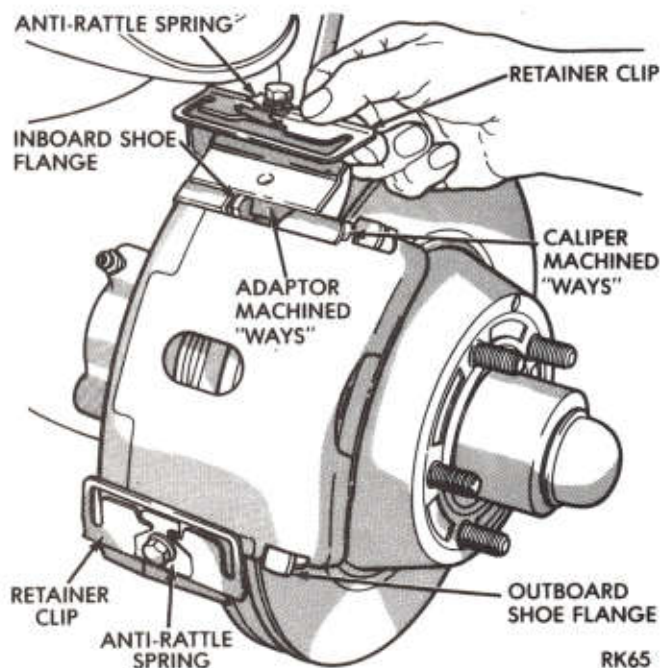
Adapter and Caliper Machined "Ways" and Caliper Retention
